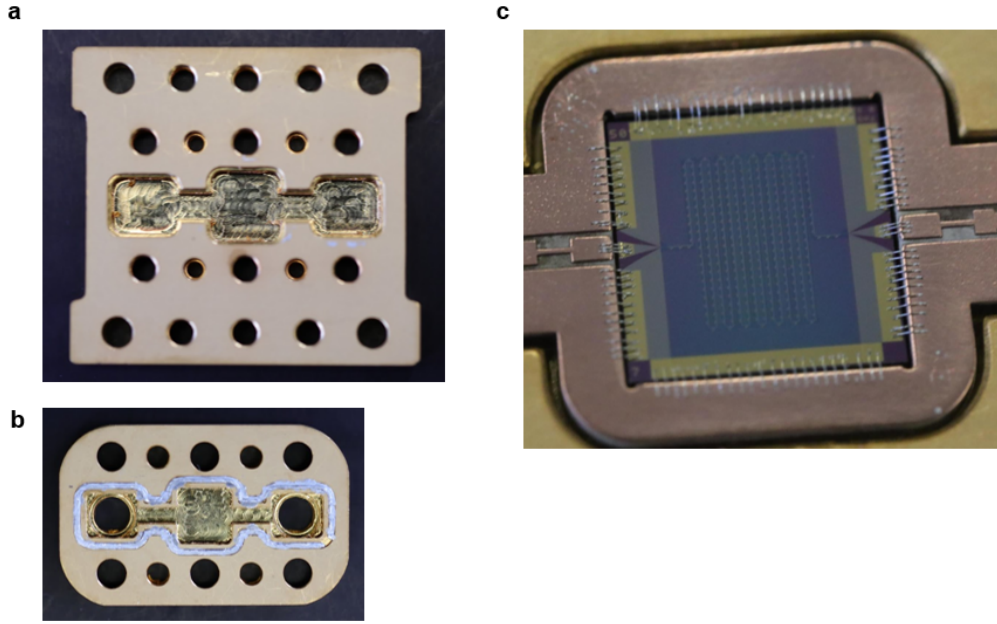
New package design, featuring (a) base, (b) lid, and (c) a picture of the encapsulated PCB holding a wirebonded 5x5 uniform JTWPA chip. Note the compensation structures on the PCB that help mitigate impedance mismatches caused by the wirebonds.
